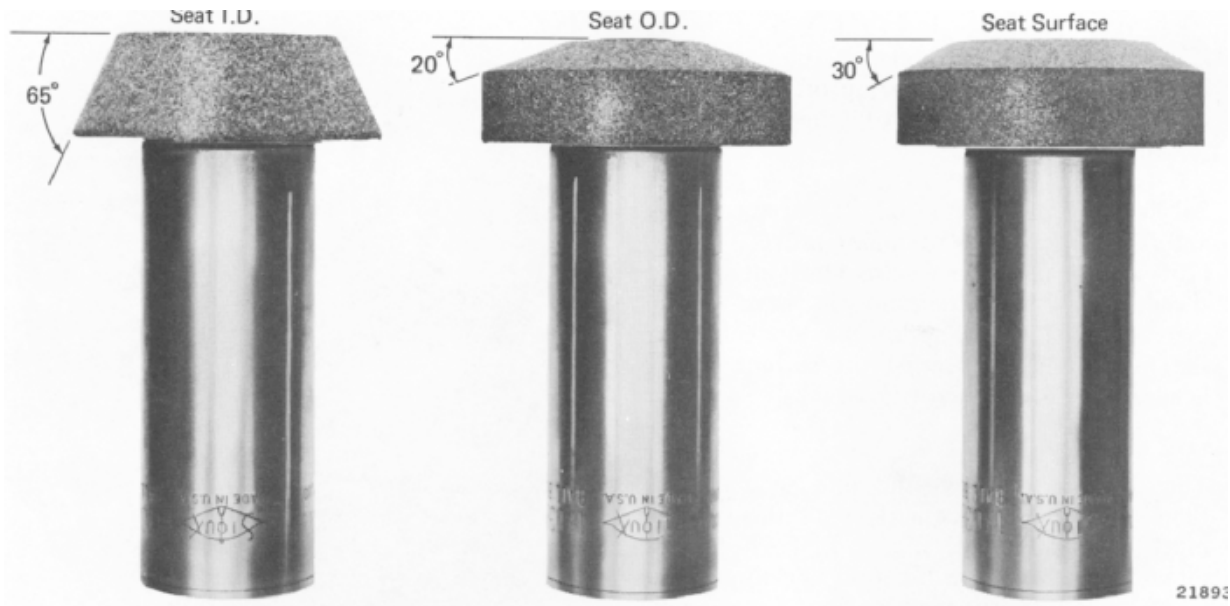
Valve Seat Grinding Wheels And Holders
